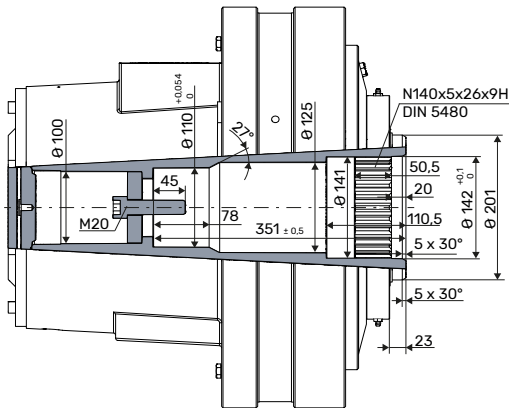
Dimensions of the shaft type 1A: Splines N140.
